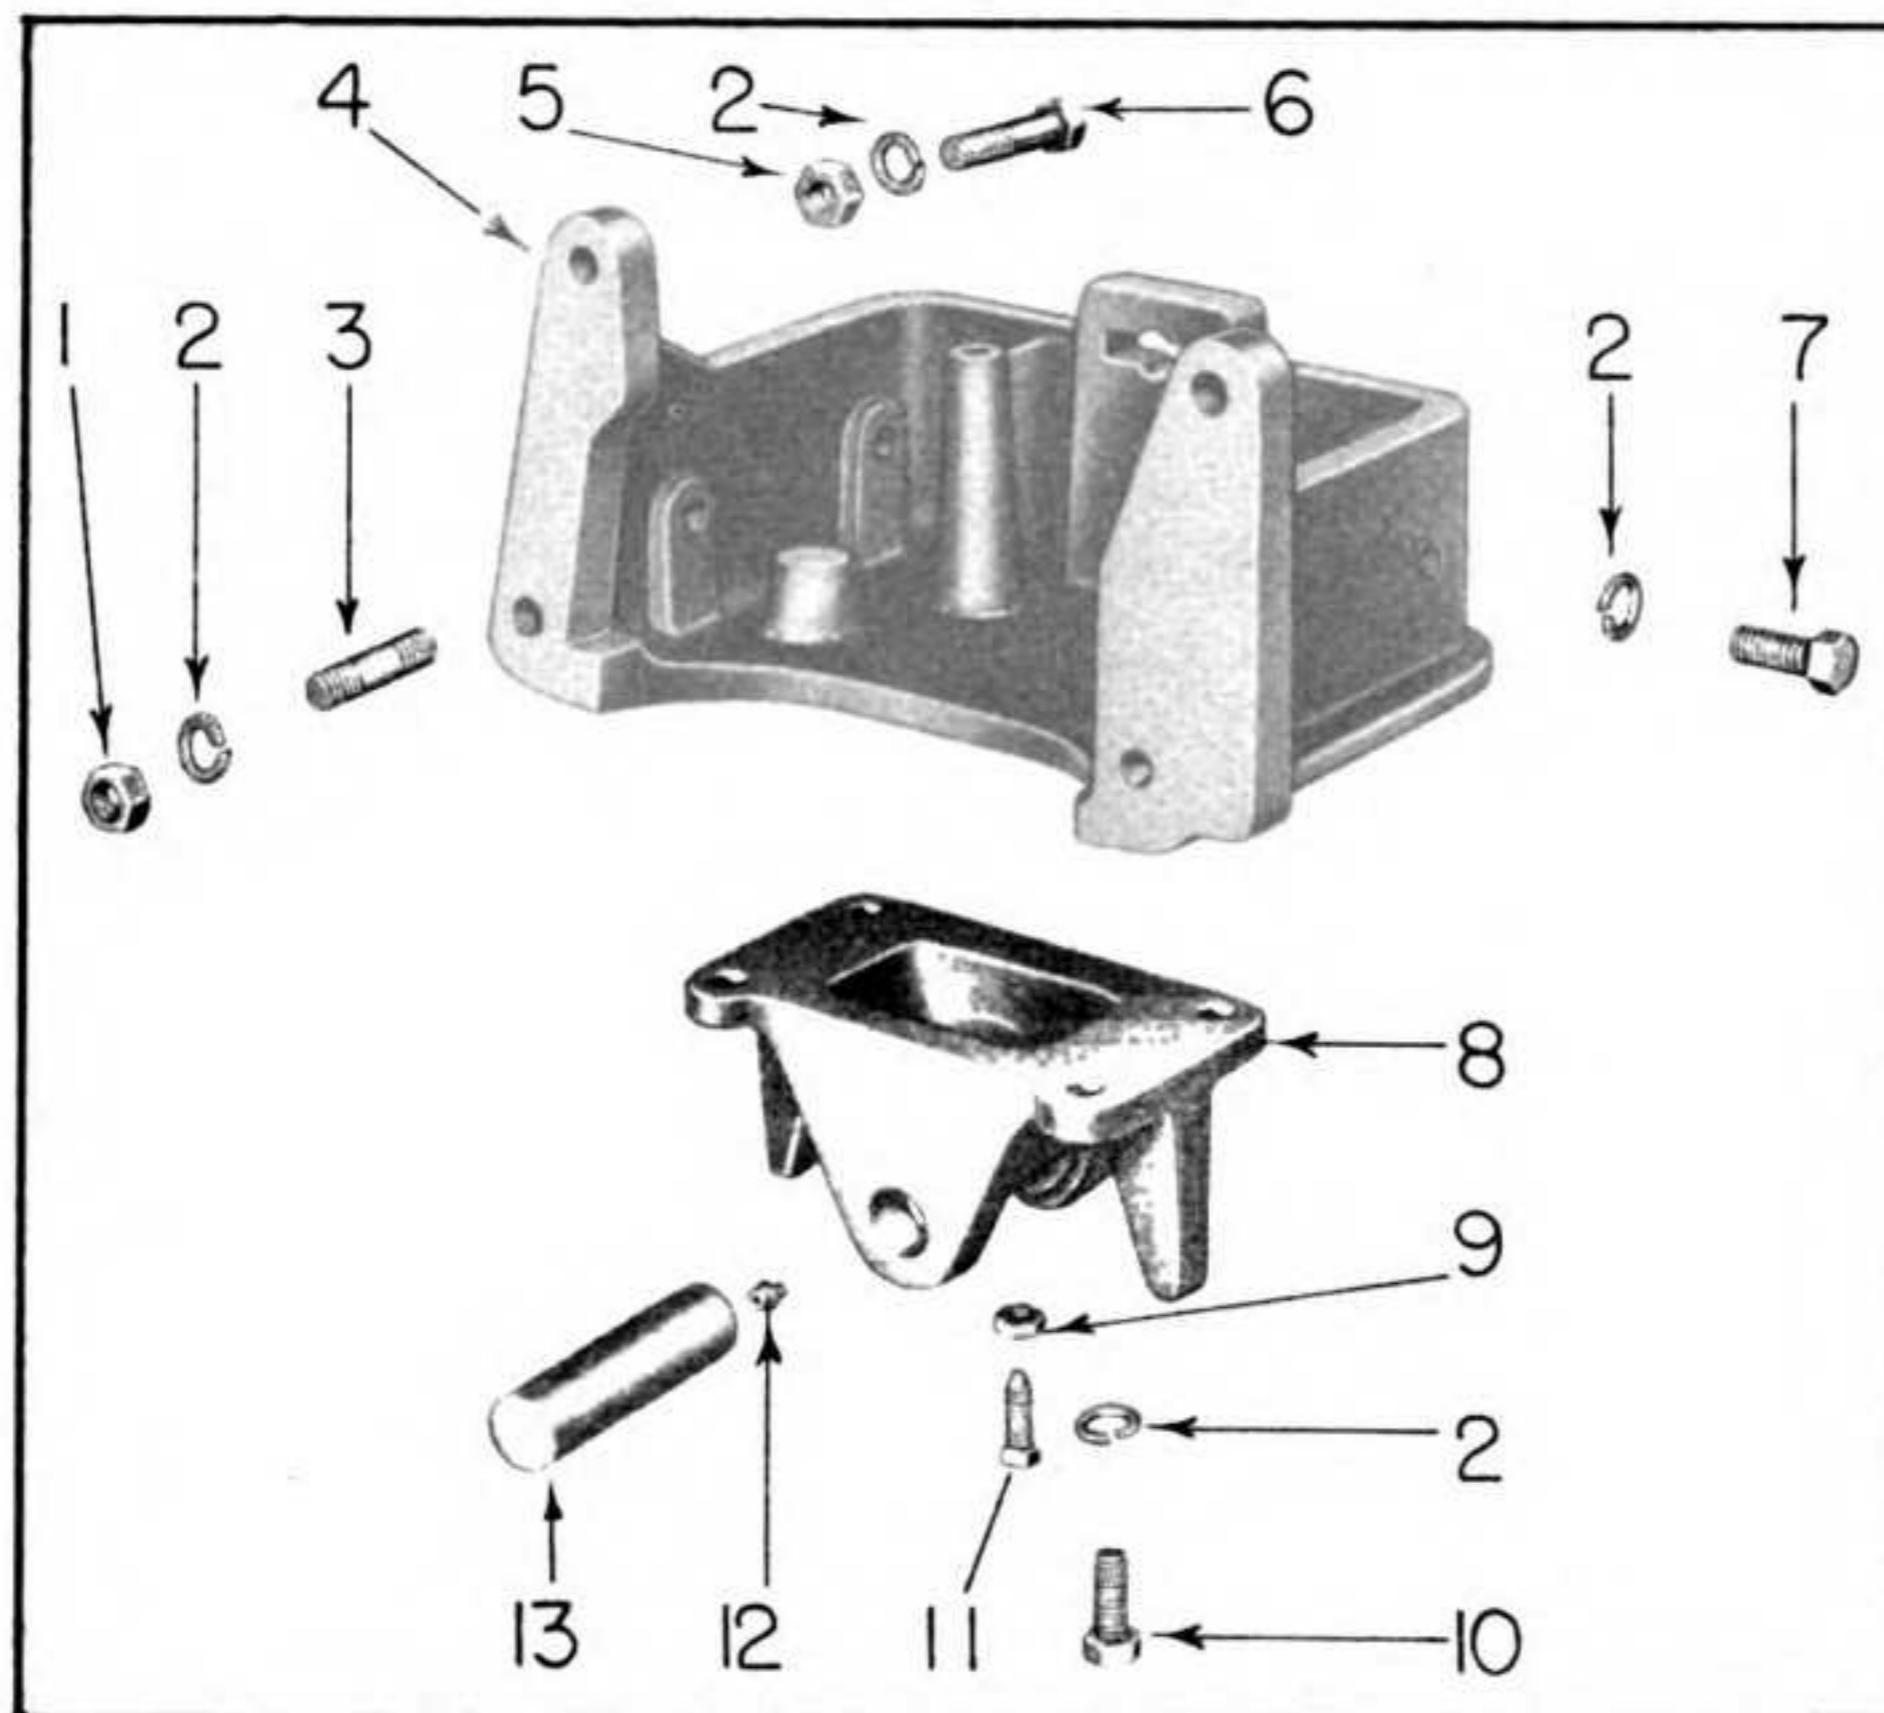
1002 FRONT END MOUNTING ASSEMBLY
